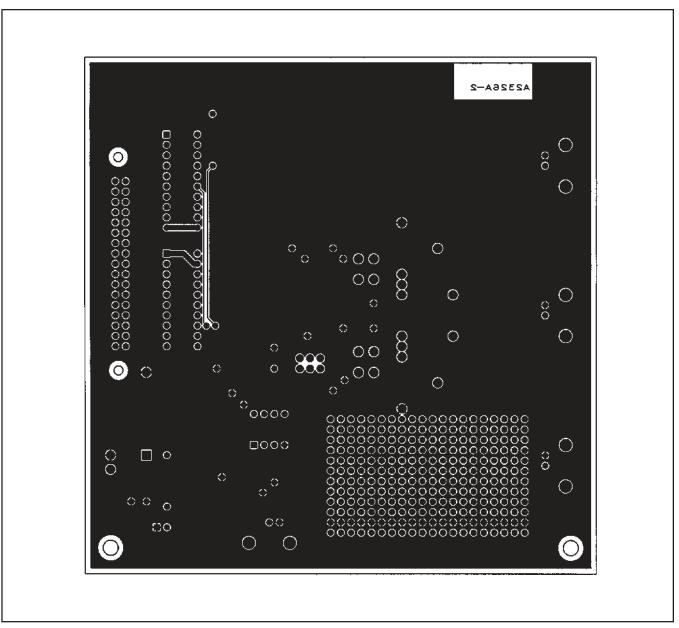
Bottom Layer of DEM-DDC112U-C DUT Board.
